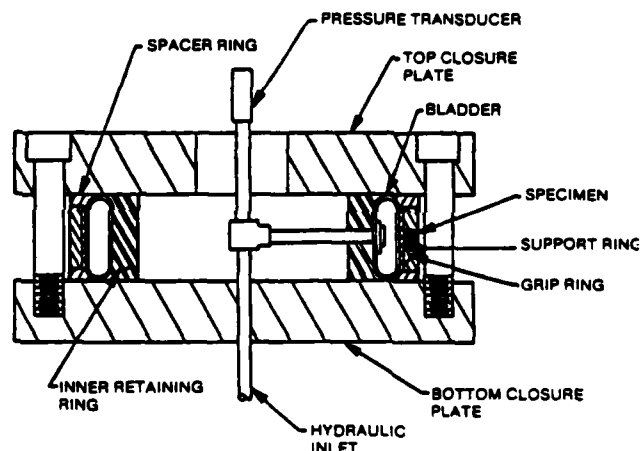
Hydrostatic Set-up For Tension Testing of Ring Specimens
